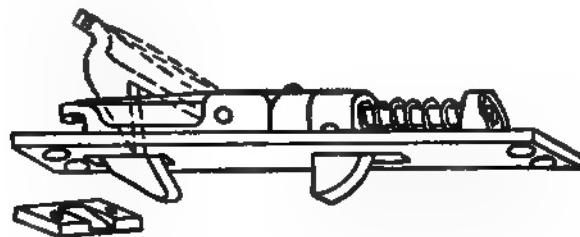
Door-Holding Mechanism Used with Bommer Special Single-Action Spring-Butt.
